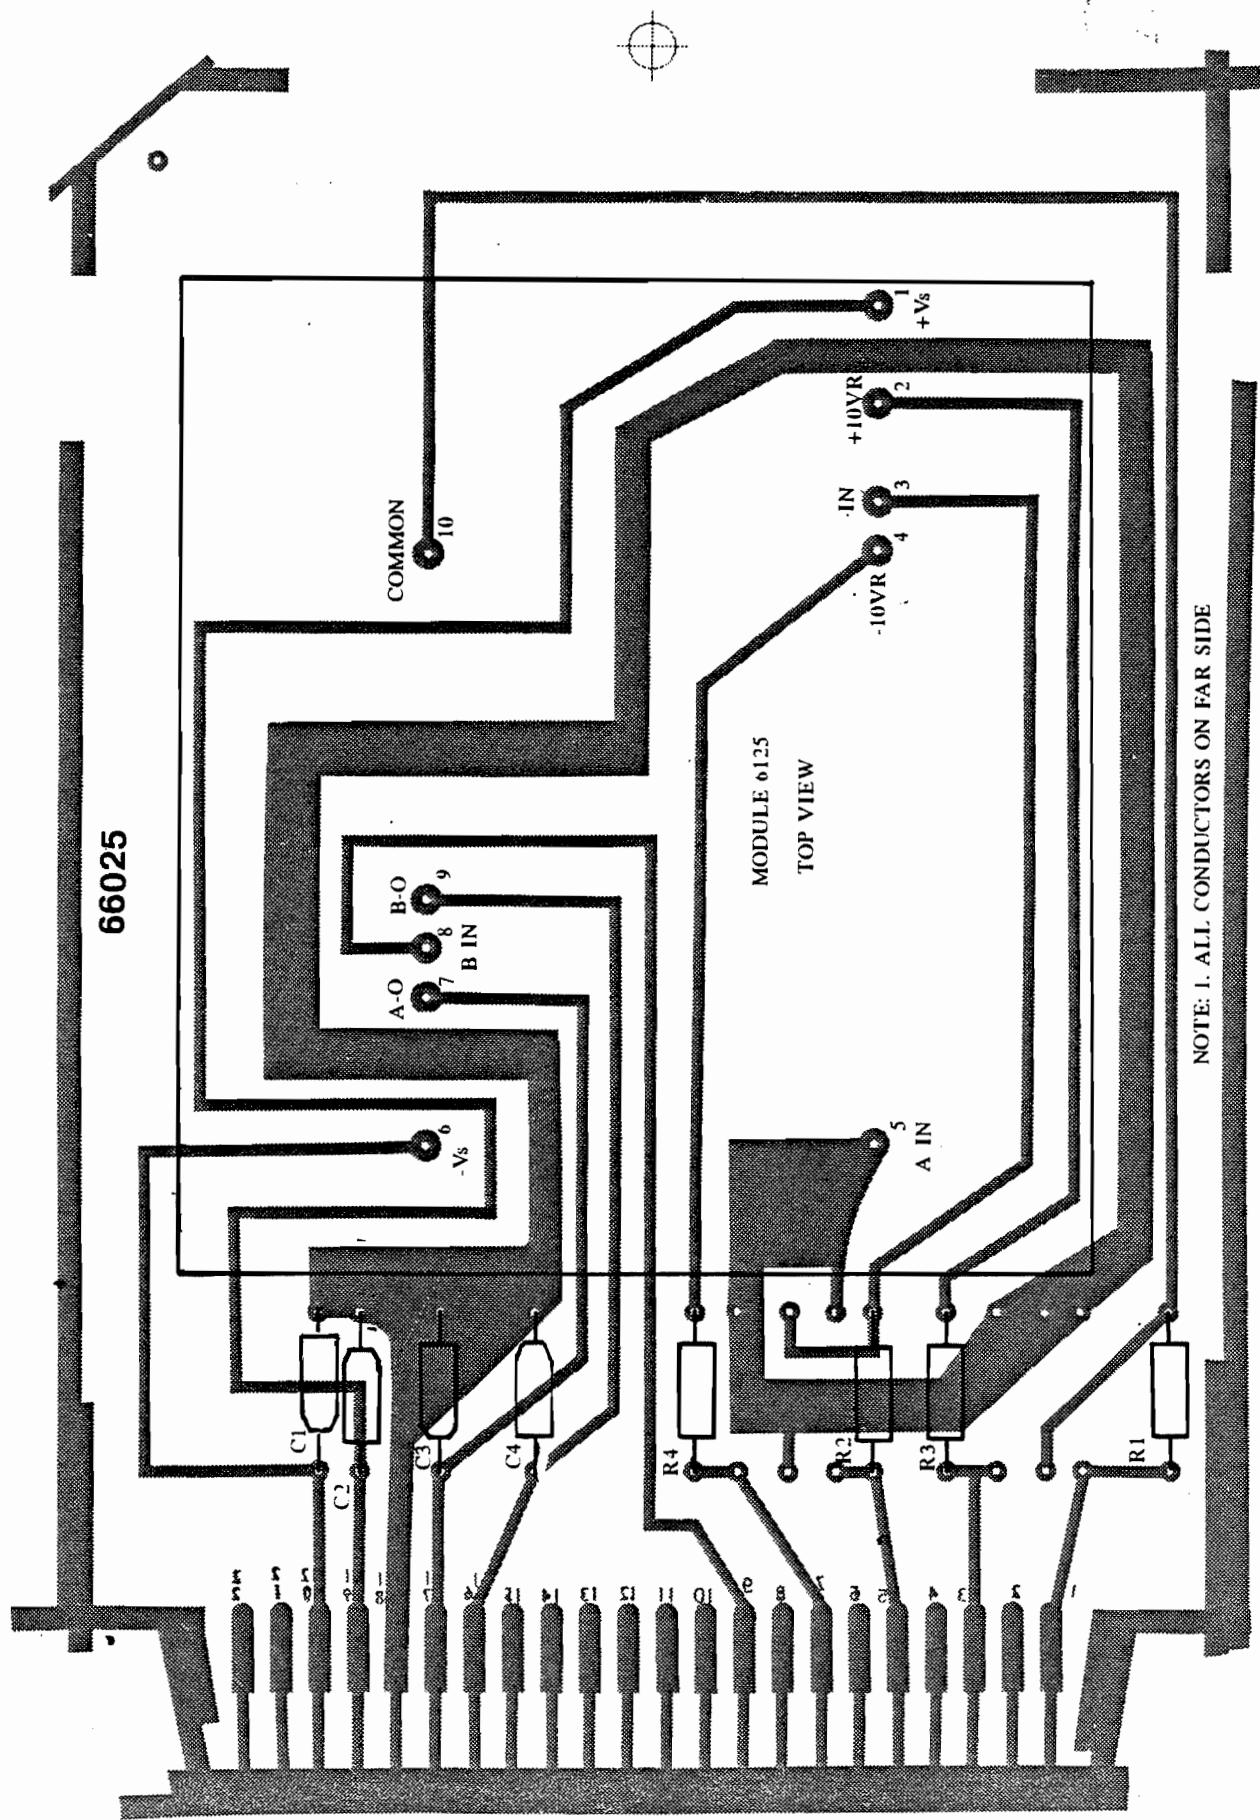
COMPONENT LAYOUT LAYOUT NO, 66025
